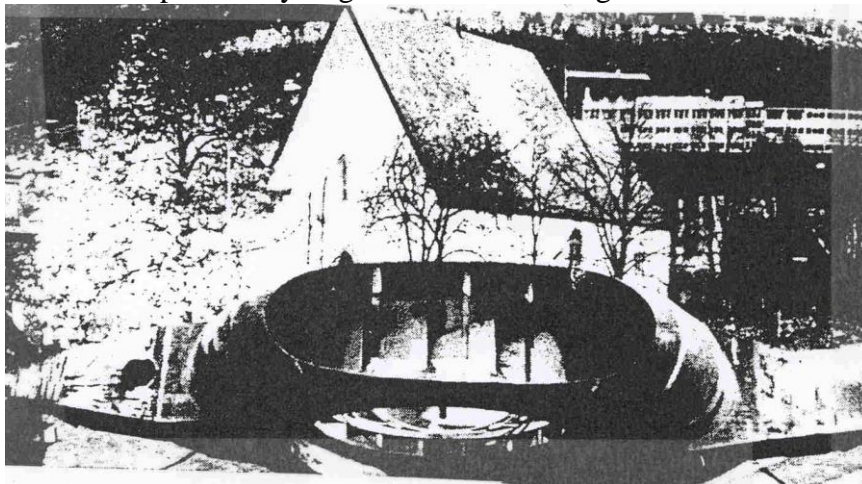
Transport of spiral casing with a one piece stay ring. Note the thin plate transport structure, which will be removed from the spiral casing shell.
